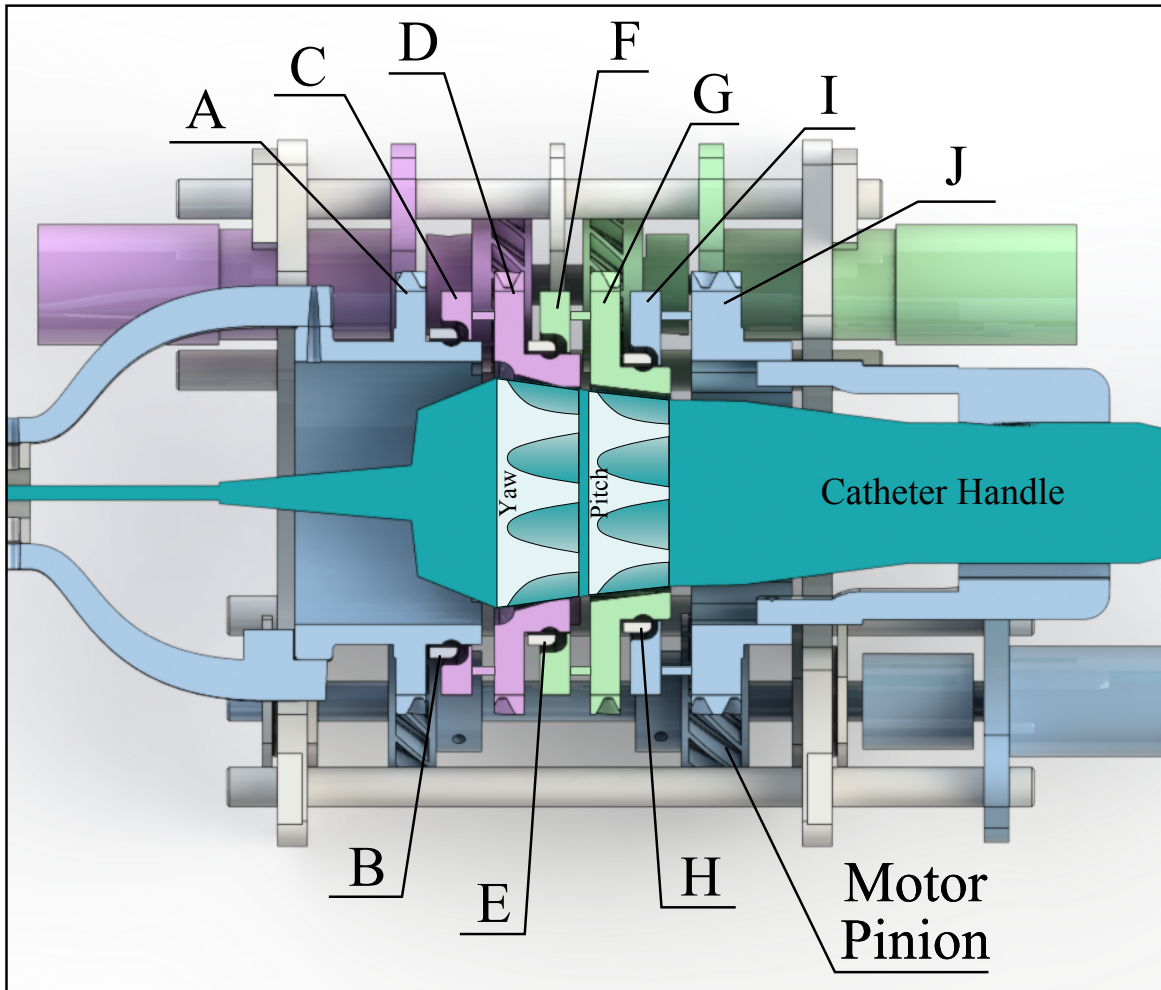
Cross-sectional view showing knob interactions with the catheter. Parts B, E, H are bearings. Parts B, C, D, E enable yaw; parts E, F, G, H enable pitch; and parts A, B, H, I, J enable roll.
